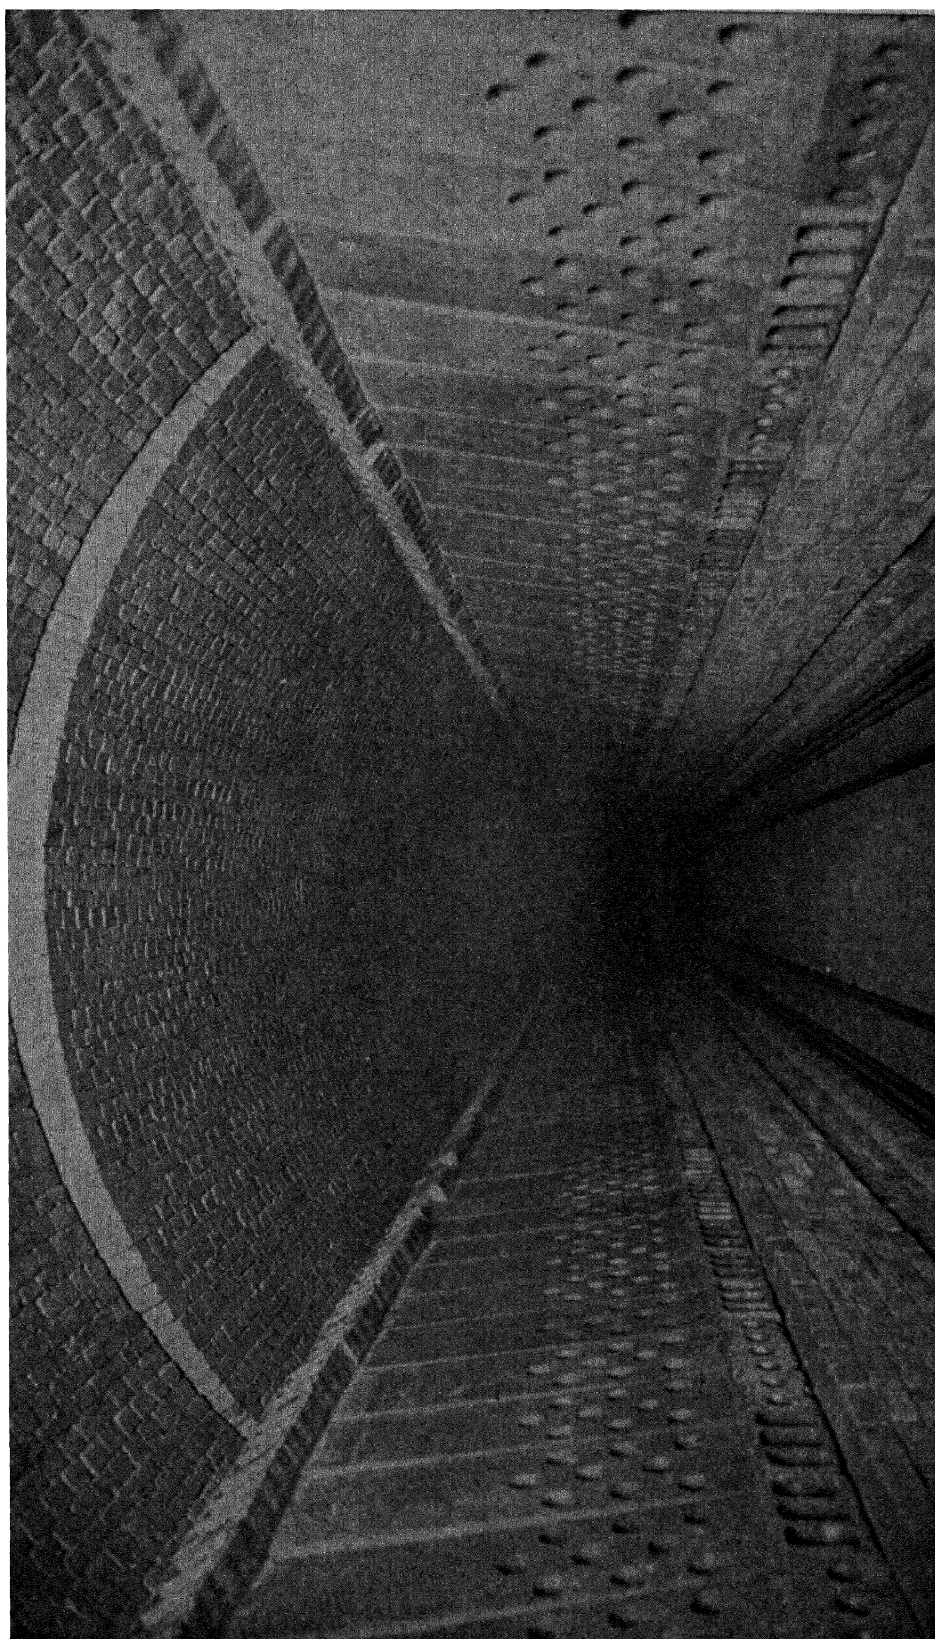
III.—Interior of a Dressler tunnel kiln.
